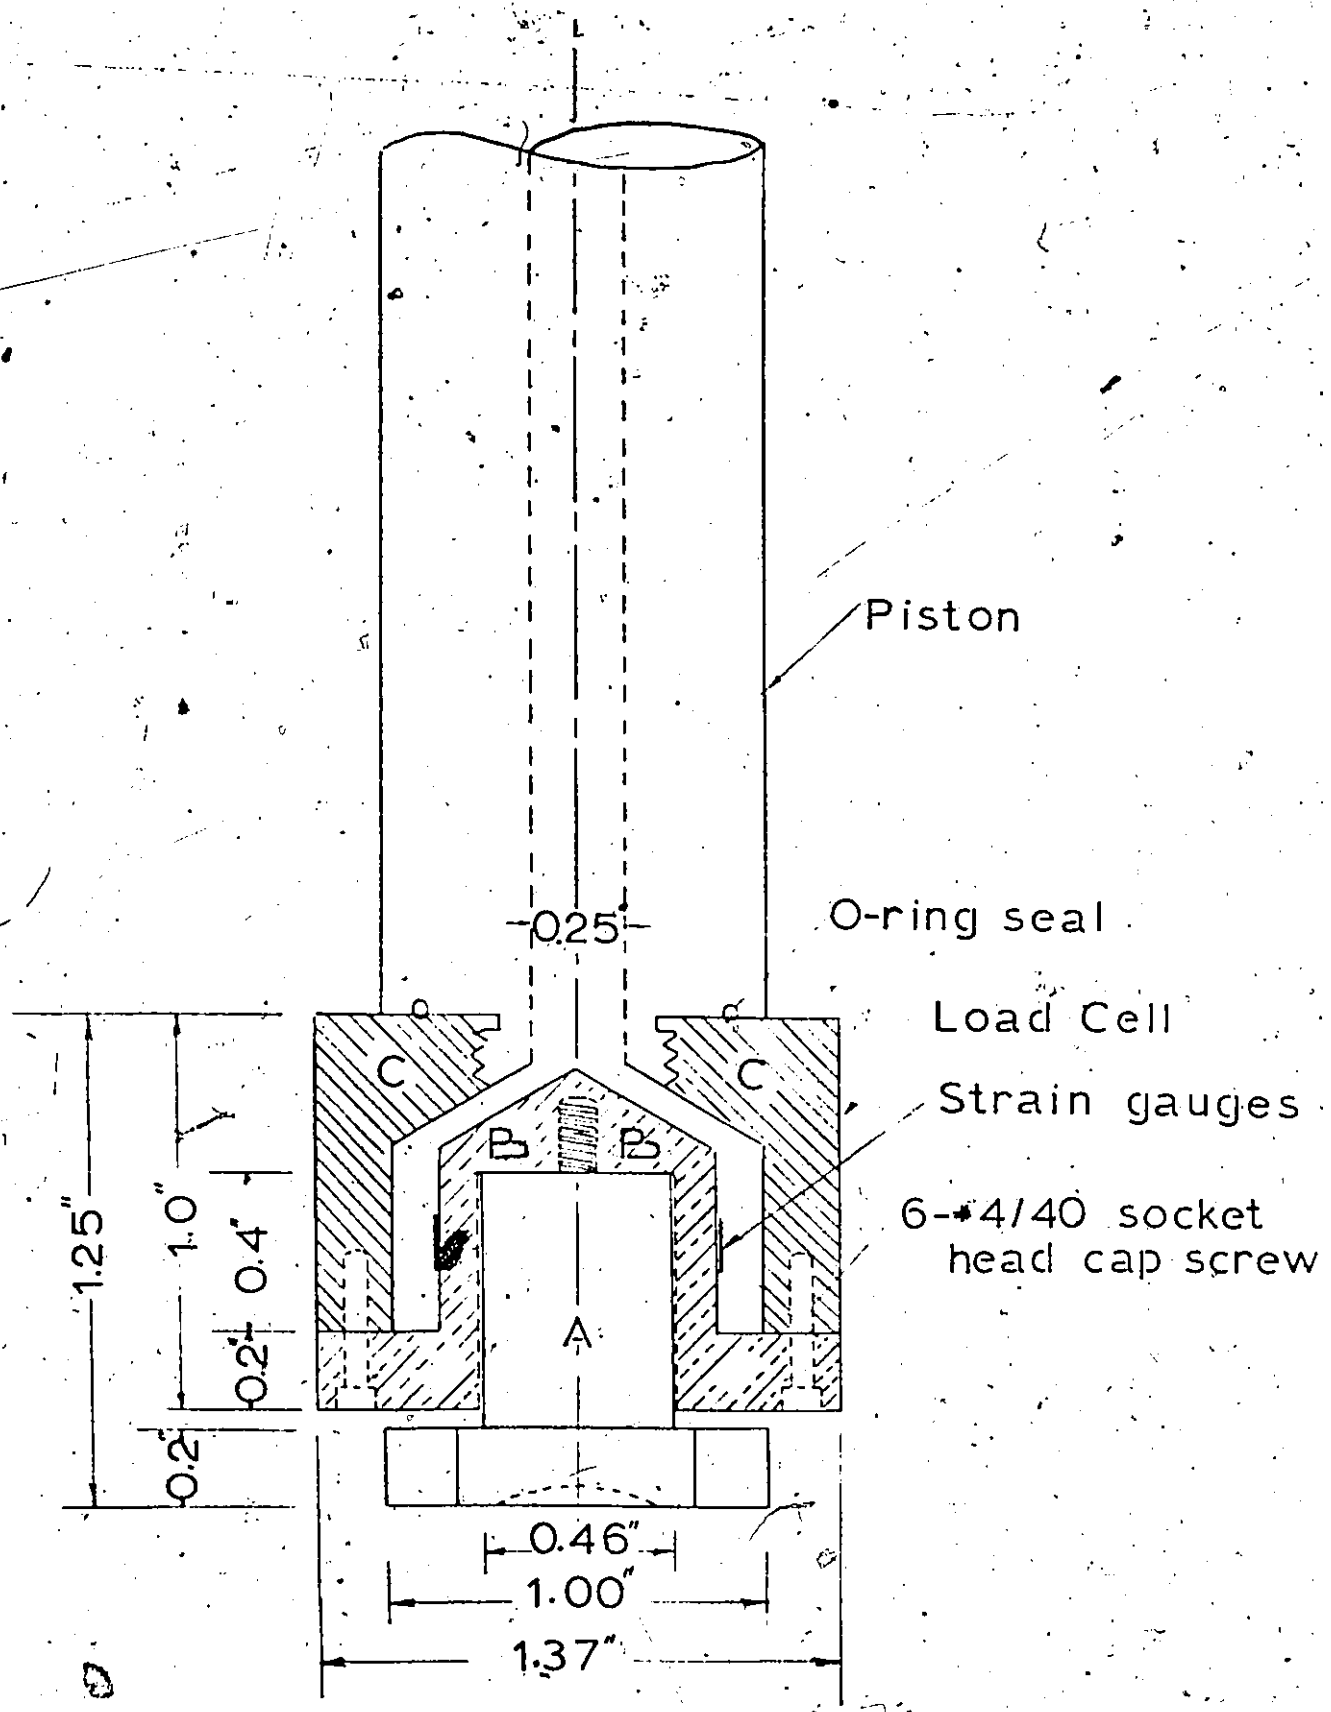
TRIAXIAL PISTON AND LOAD CELL ASSEMBLY.
